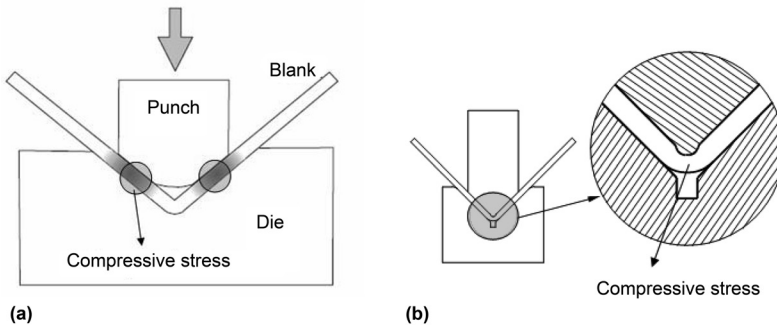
(a) Bottoming and (b) coining in V-die bending
